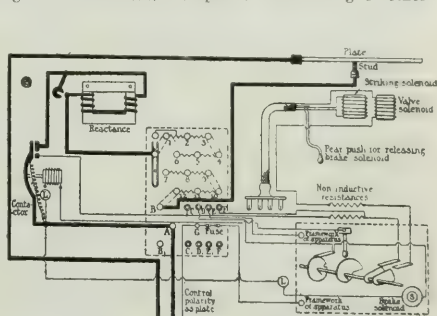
CONNECTIONS OF ELECTRO-PNEUMATIC WELDER.
